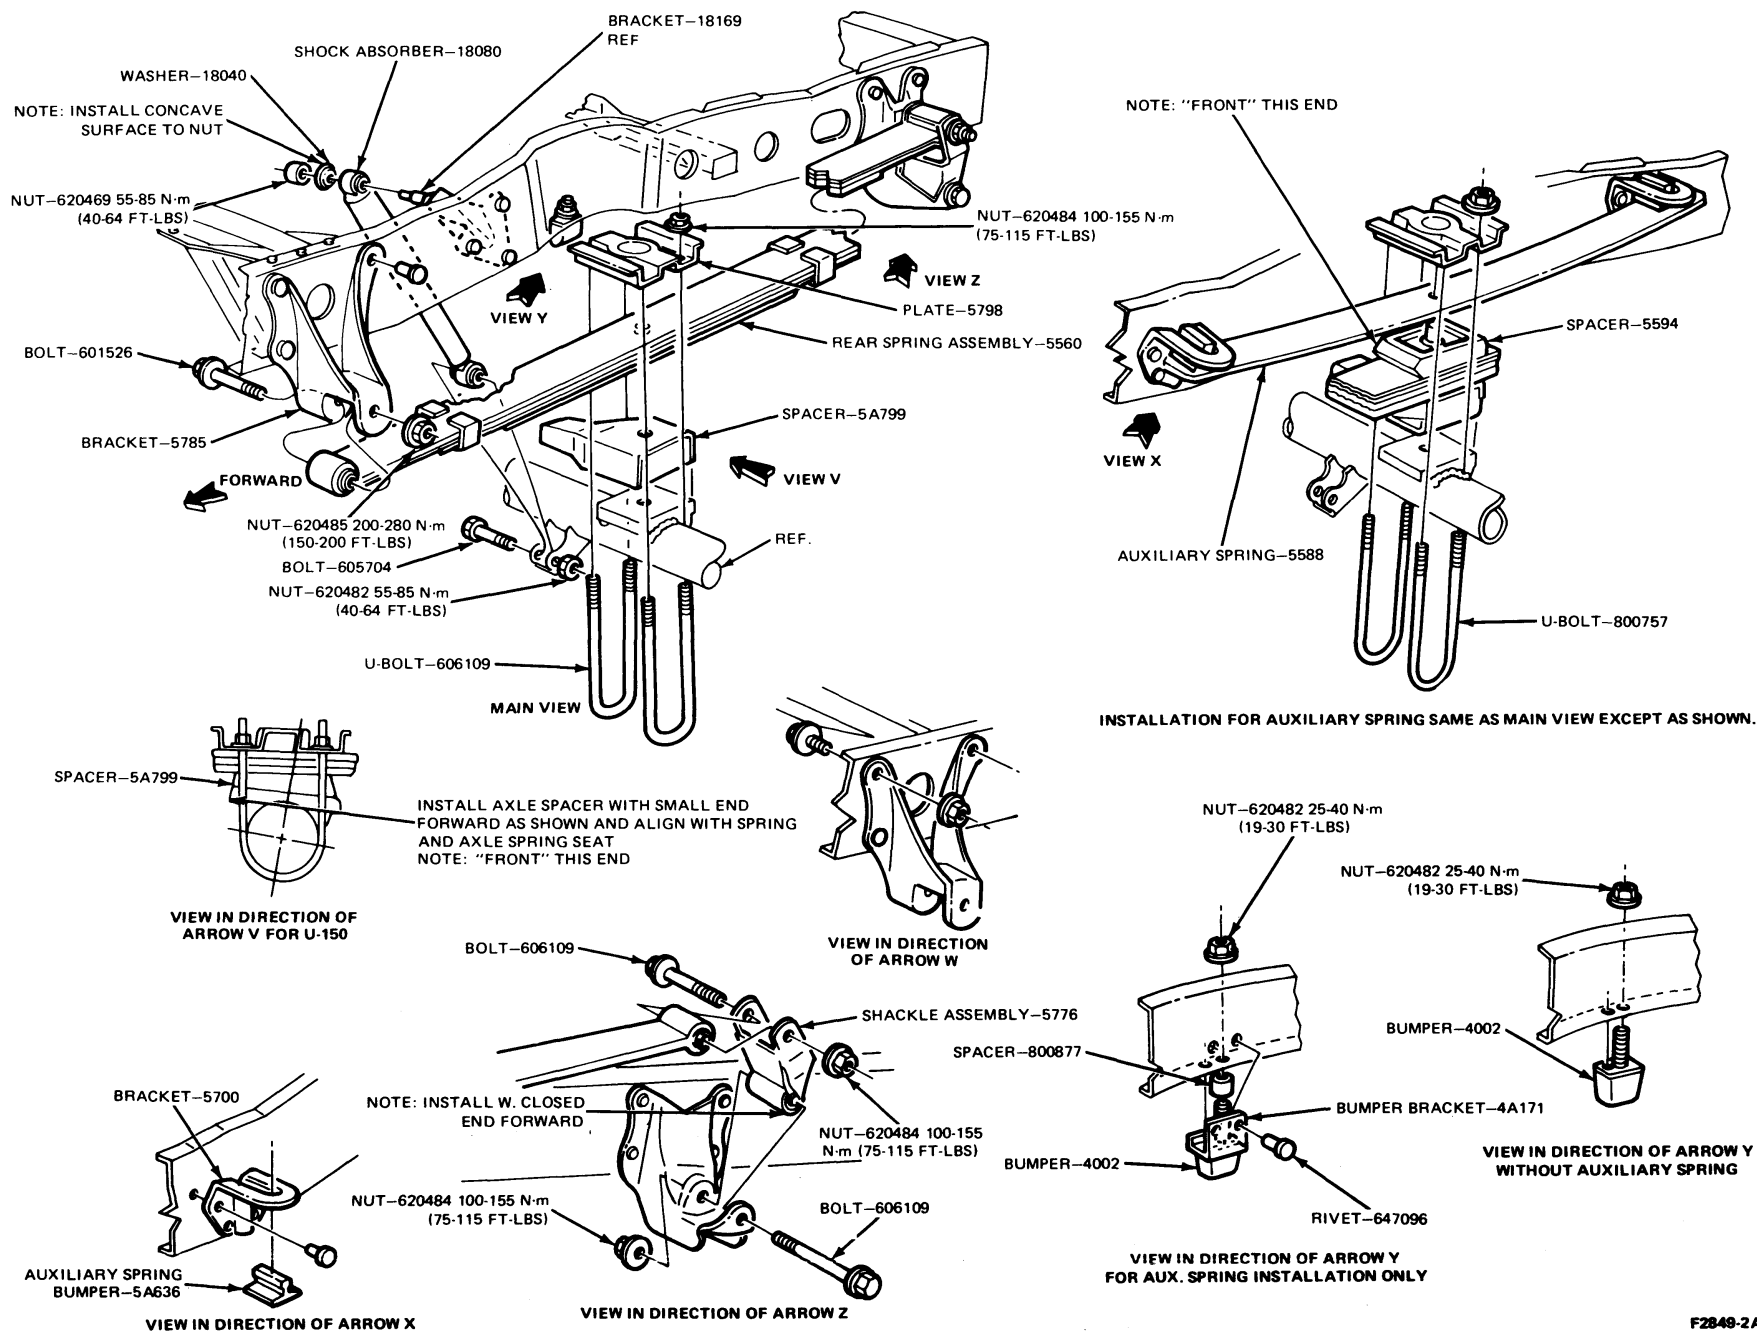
Rear Spring Installation—F-150—350, (4 x 4) Bronco
